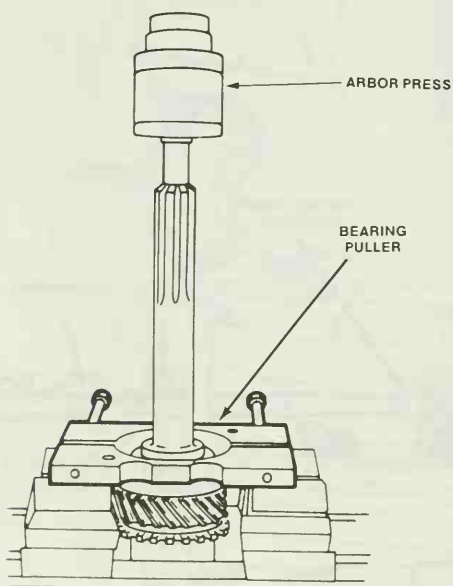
The front bearing is removed on an arbor press. (American Motors Corporation)
